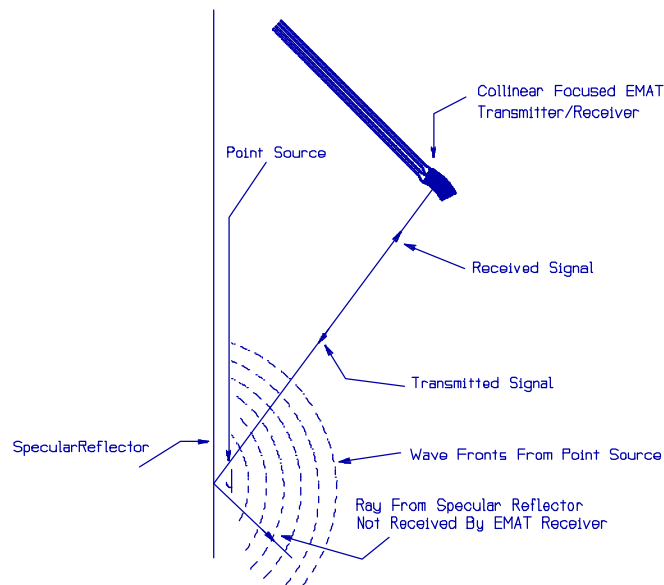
Diffraction Technique for Surface Inspection of Welds.
